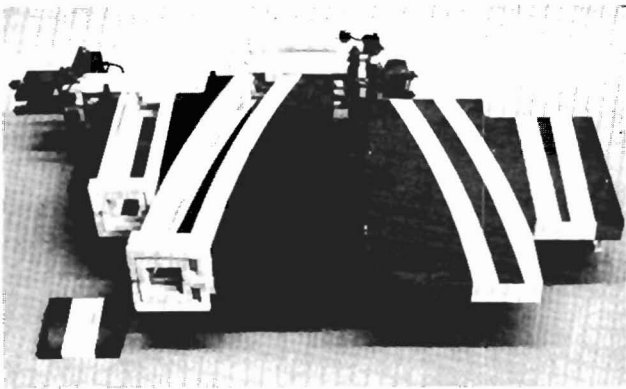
Magnet partial assembly, TR-BM-02, 06
